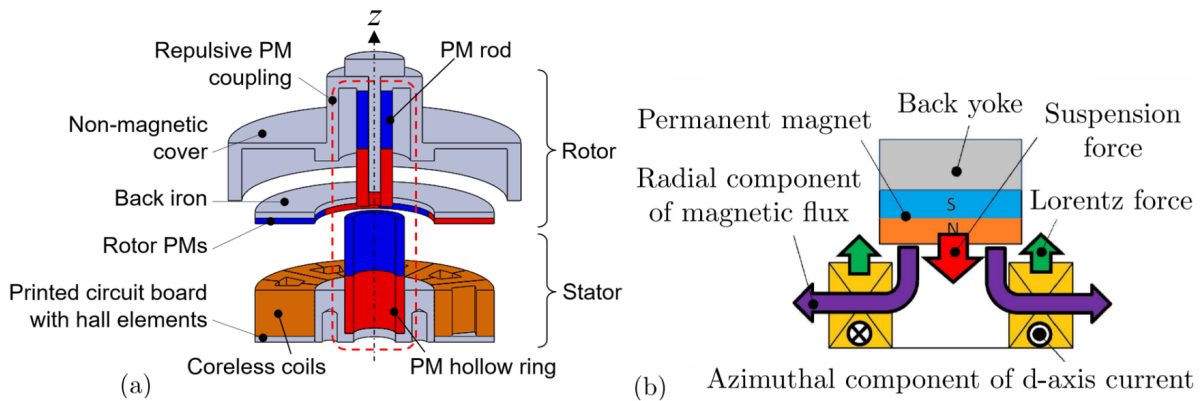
Single-drive single-sided axial flux machine (from[34]). (a) Exploded view of the machine. (b) Axial force generation.
